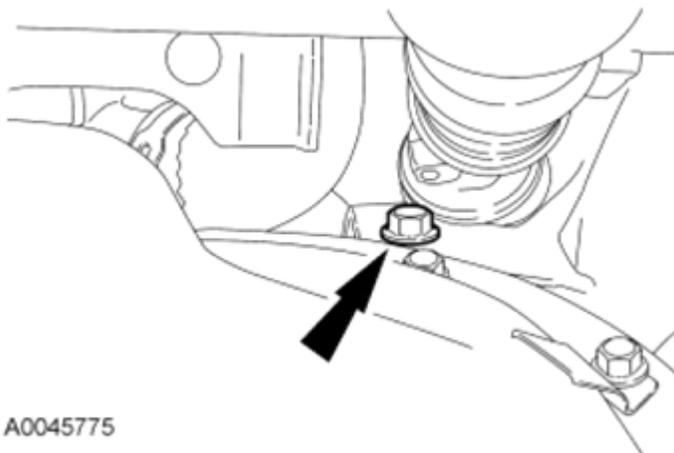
Locating Upper Front Axle Carrier Mounting Bushing Bolt
